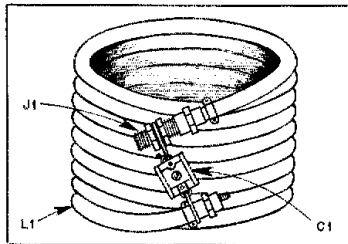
The compact breaker loop assembly. Construction of the assembly is discussed in the text.
